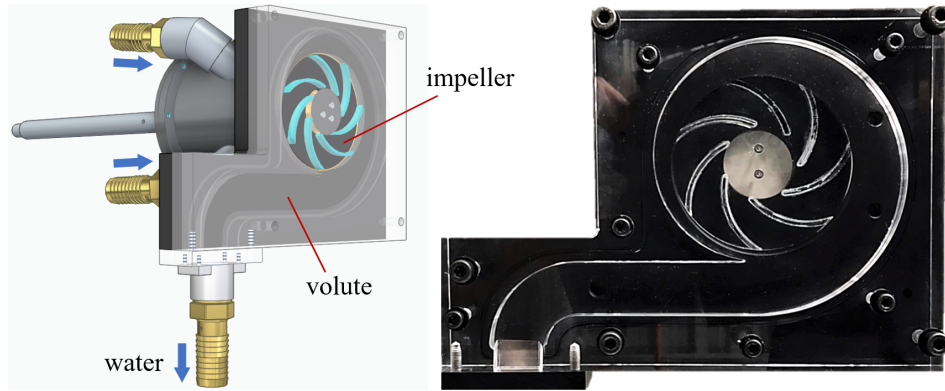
Technical drawing (left) and photograph (right) of the centrifugal pump prototype.
